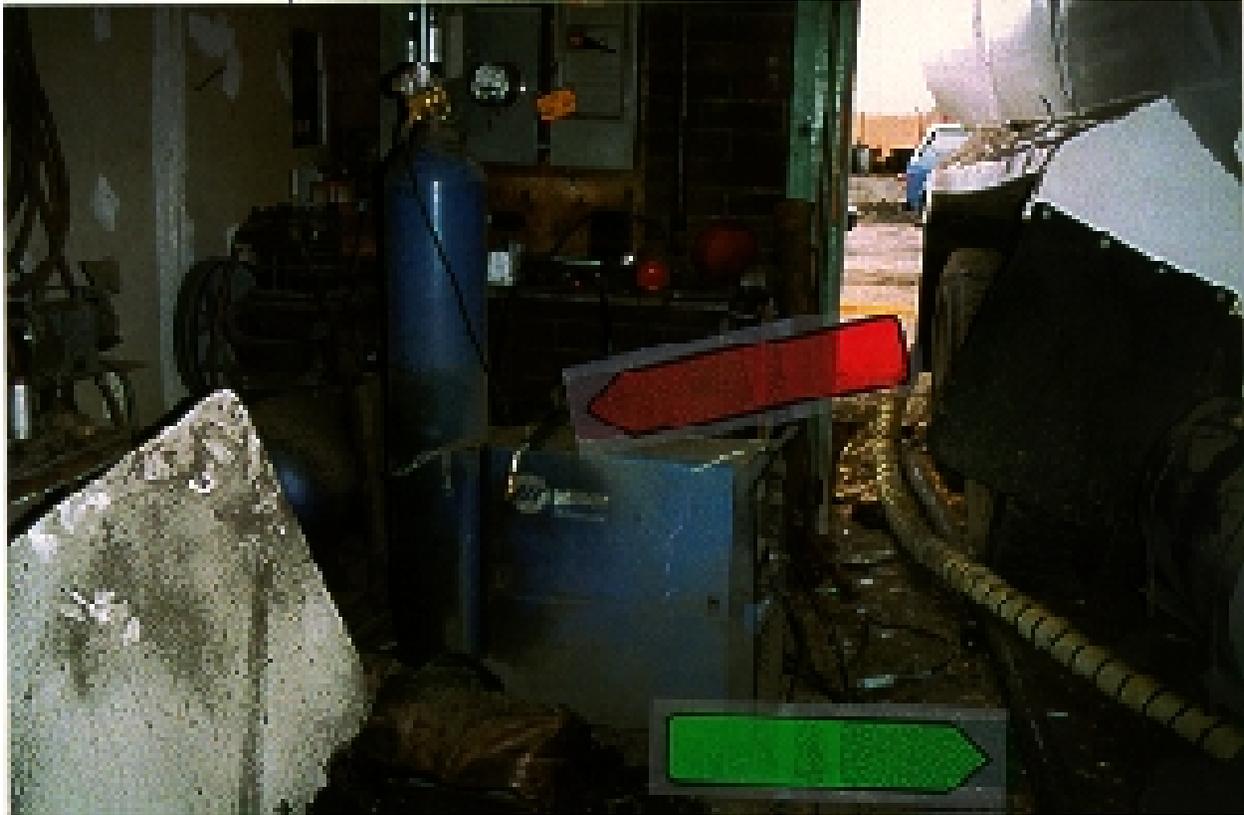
Arrow shows the opening where the overflow pipe was to be welded.
